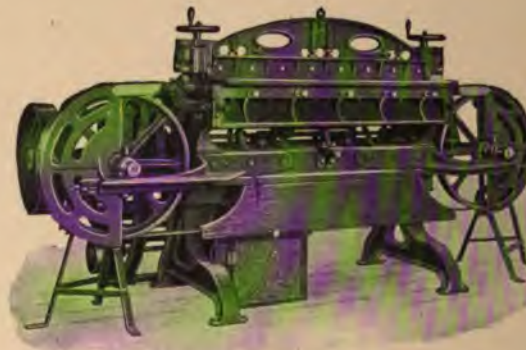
Band-knife Splitting Machine.<sup>1</sup>
